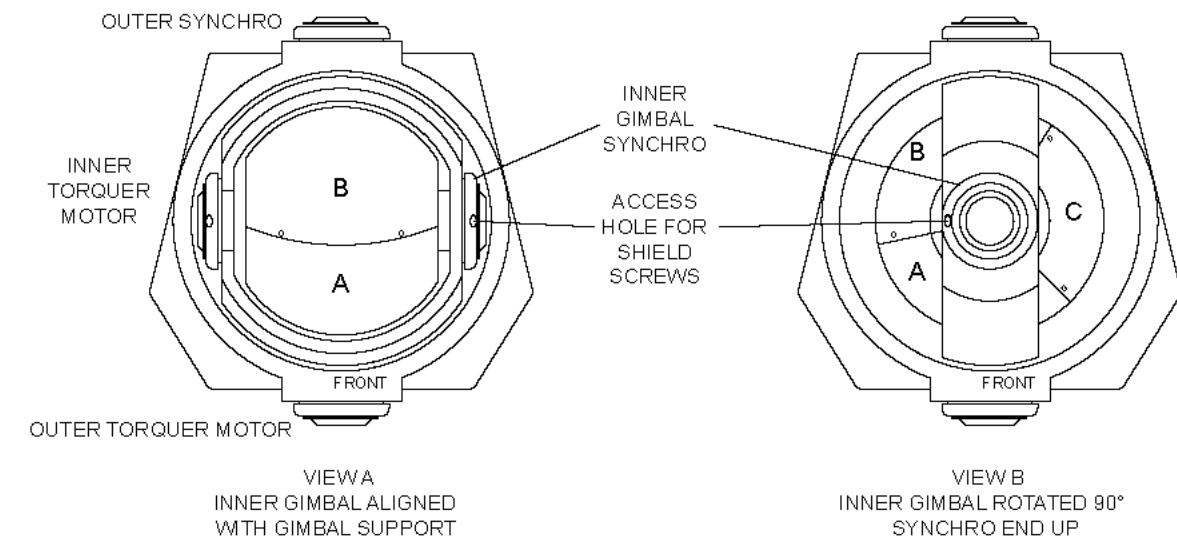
Mounting of Magnetic Shield on Sensor Block Assembly (1A2A1A1A9)
